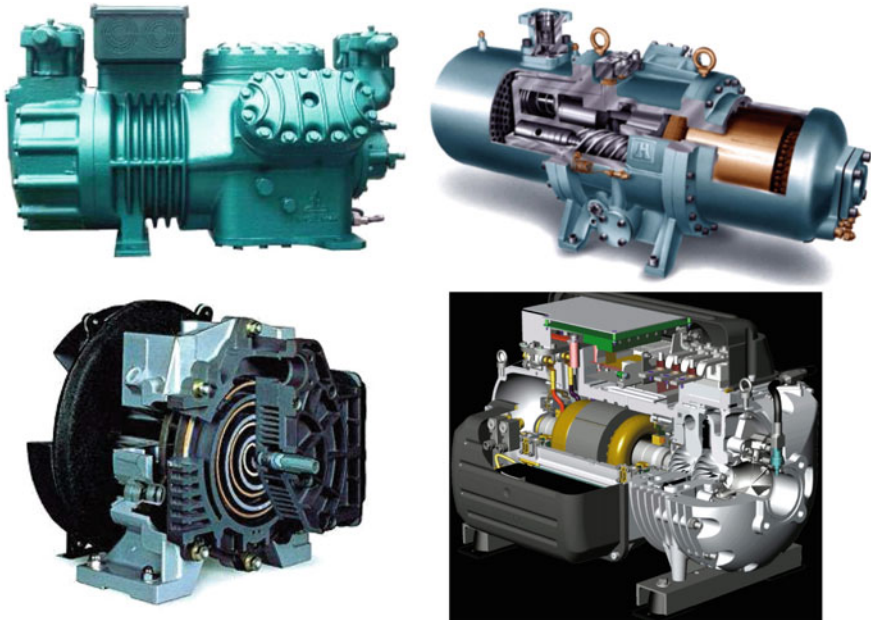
Types of compressors commonly used in vapour compression chillers; top left (www.danfoss.com): reciprocating; top right (www.bitzer.de): screw; bottom left (www.daikin.com): scroll; bottom right (www.smardt.com): centrifugal
